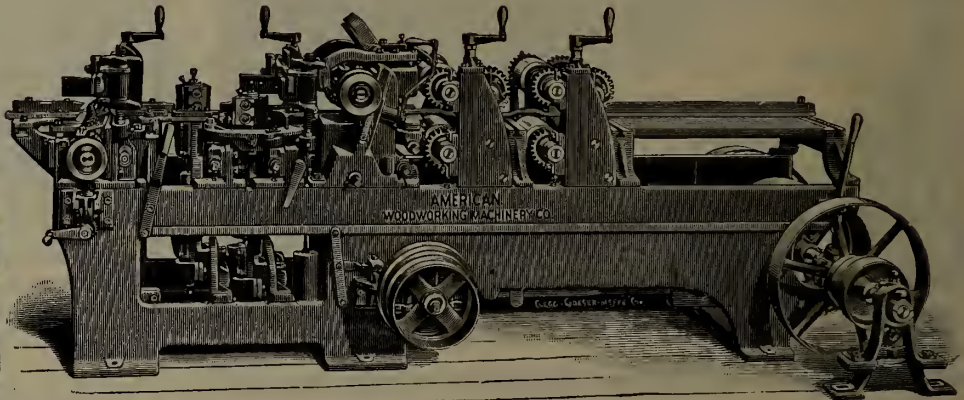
Glen Cove 8", 10" 12" and 14" Inside Moulders.
